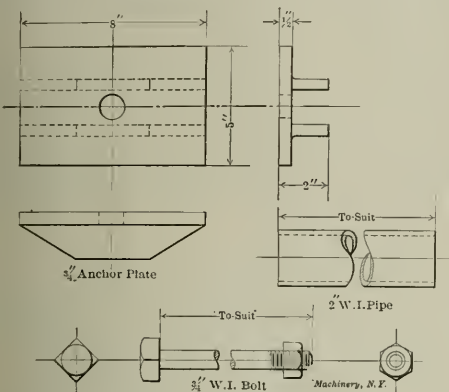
Old Style Anchor Plate for Square Head Bolt.
